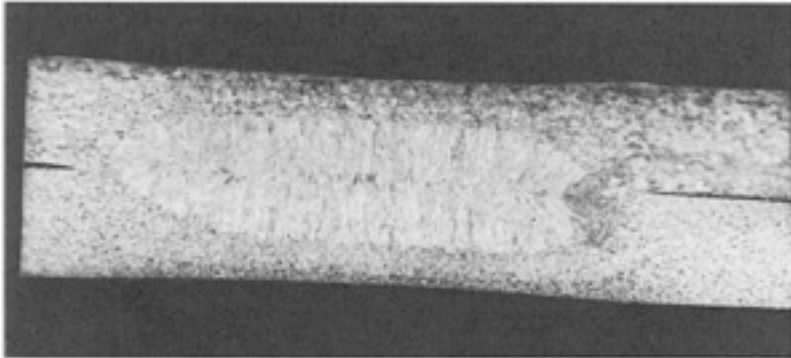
Low-carbon hot-rolled sheet, resistance spot weld (composition and weld parameters unknown). Macrostructure shows 60% penetration of the weld and columnar growth pattern in the fusion zone. 85 mL H₂O + 15 mL HNO₃ + 5 mL methanol. 10×
